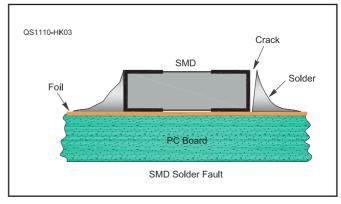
When you are soldering SMD components, it is possible for the solder to build up, forming a gap between the component and the solder. Such a broken connection can be very hard to find.
